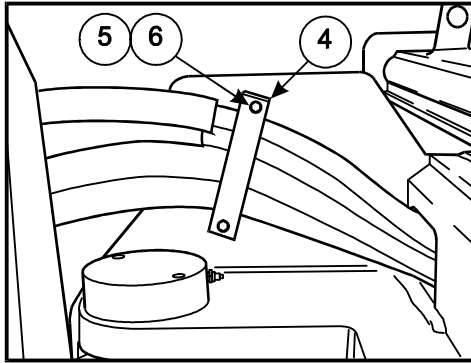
Hydraulic Pump and Motor Assembly, p/n: 1411872-C
